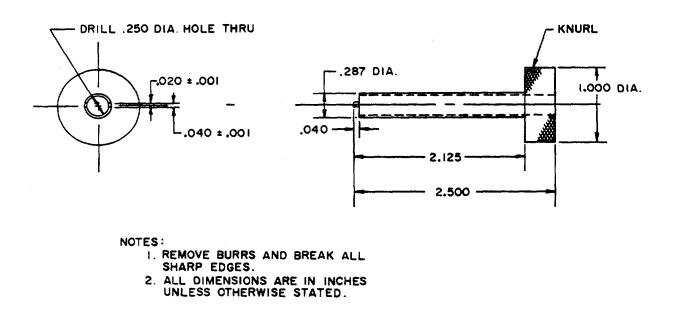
Two Piece Eccentric Tool (Sheet 2 of 2)
